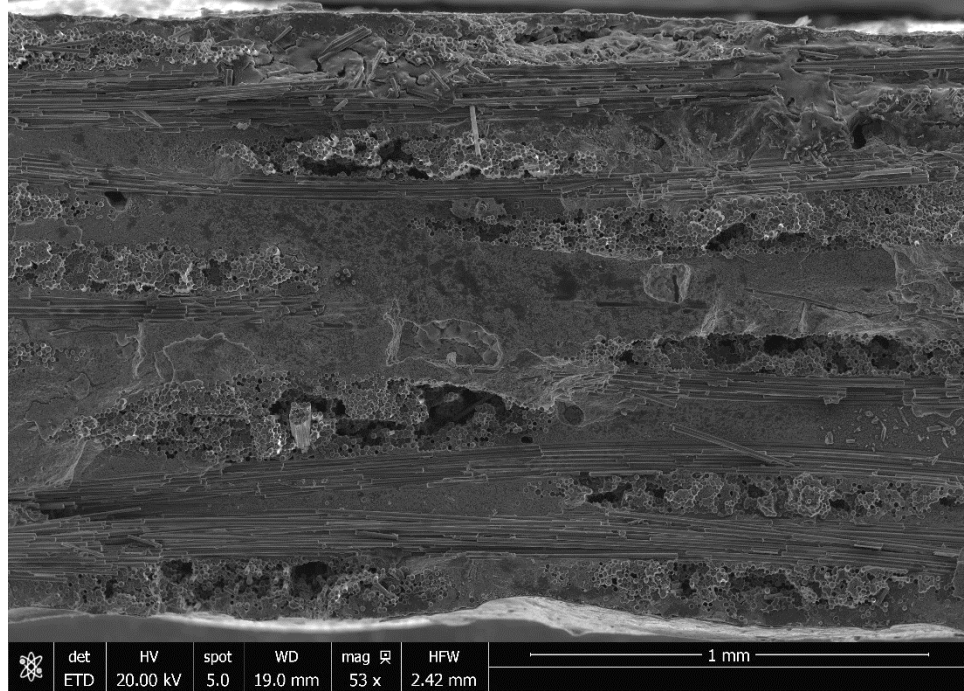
Fracture Surface for Plate 2 Annealed Dogbone Tested at MMD lab
